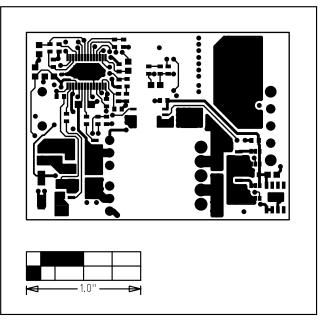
MAX5051 EV Kit PC Board Layout—Component Side
